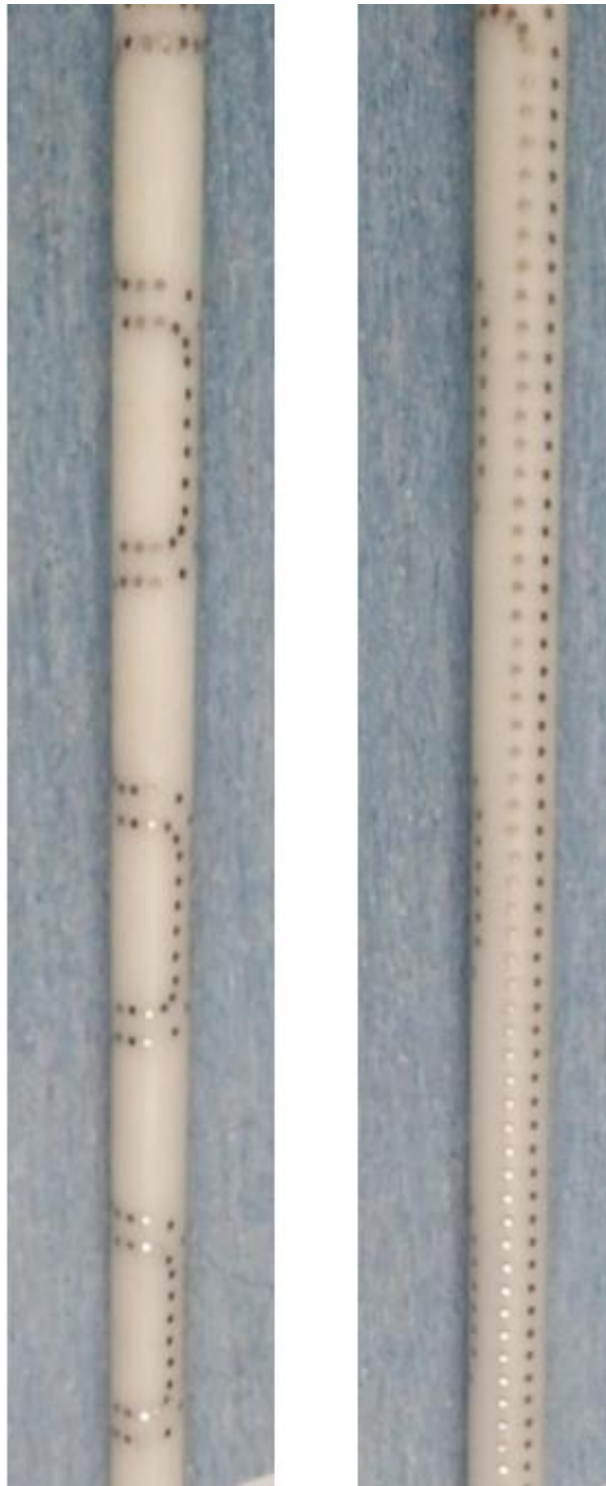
Nylon 6 magnet pack assembled. On left front view, on right rear view.
